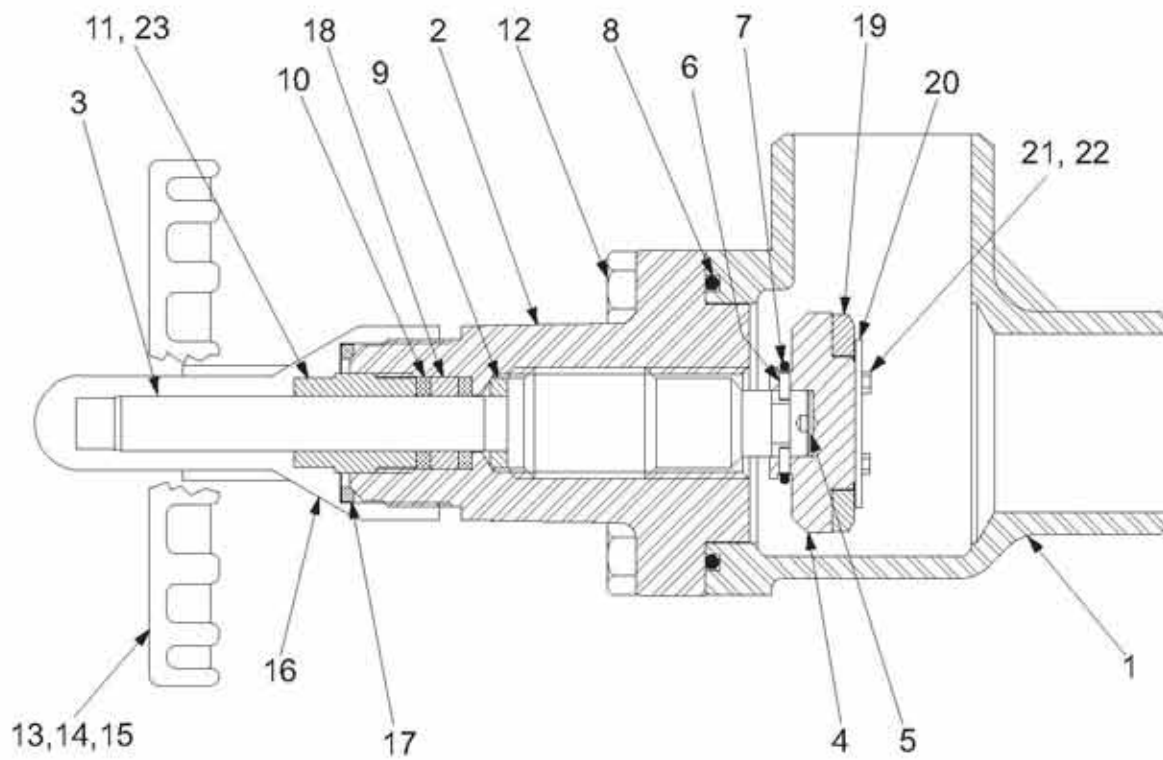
Angle Shutoff Valve Parts, 5" and 8" (Frick®)
